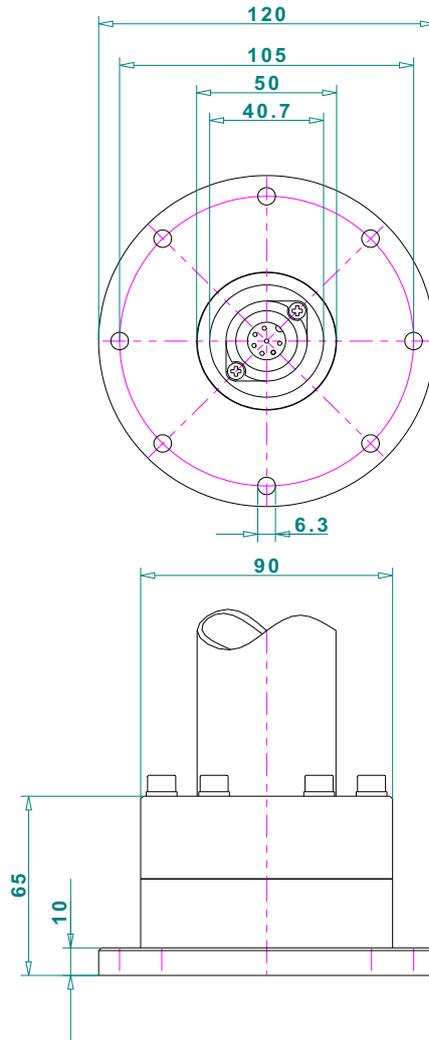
Antenna Unit, mast flange (mechanical dimensions)
